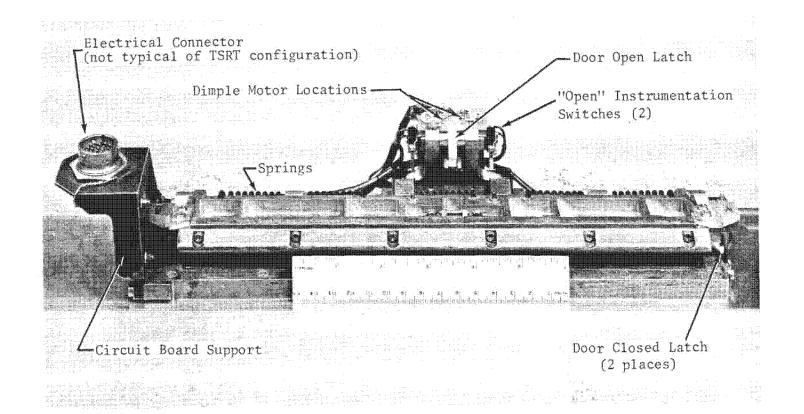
Cutter/Sealer Assembly (Partially Closed)
